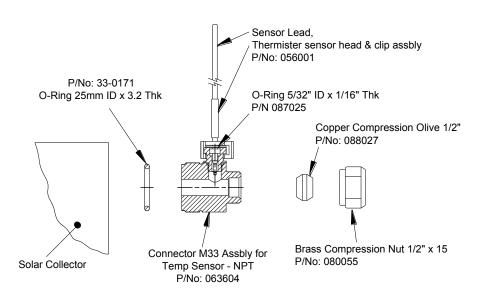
DETAIL A - COLLECTOR UNION ASSEMBLY - SCREWED FITTING
